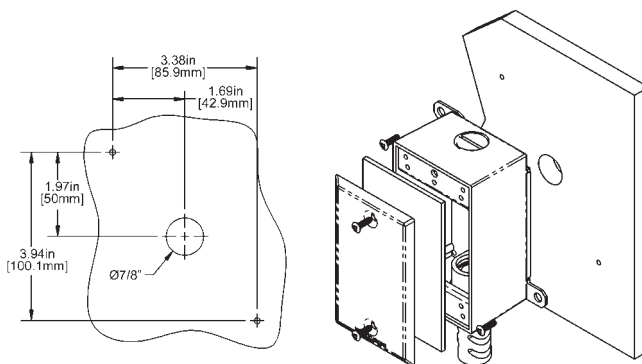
BAPI's WP enclosure and mounting hole dimensions.
